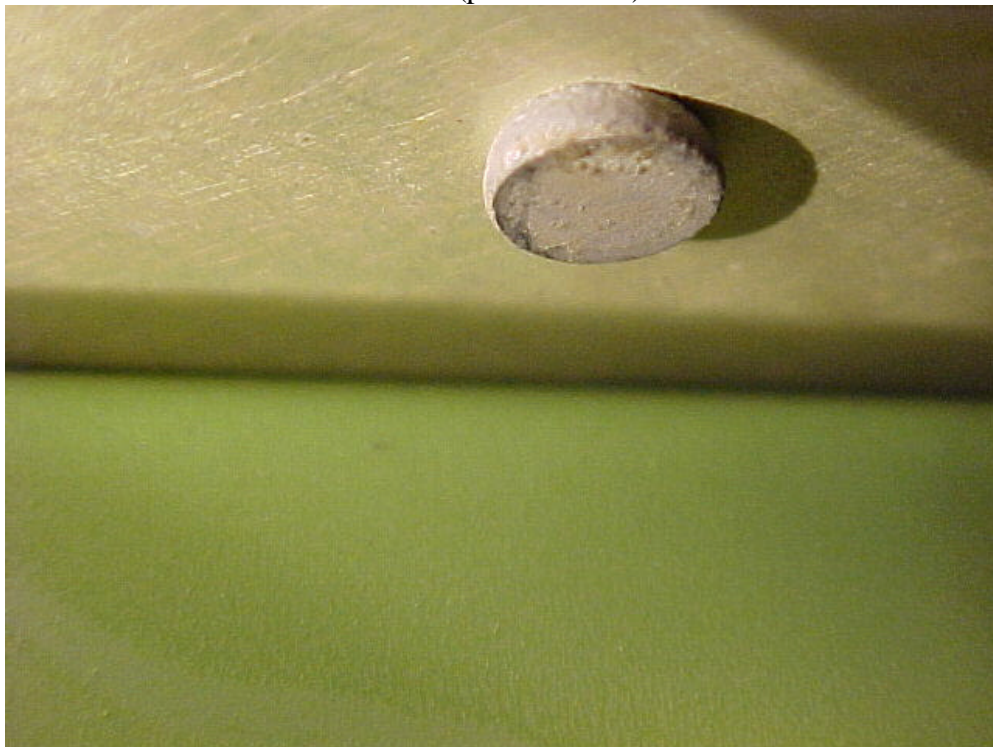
Photograph showing internal detailed visual inspection indication at BS 720D, stringer 4R, rivet 8 (panel FT3/F5).
